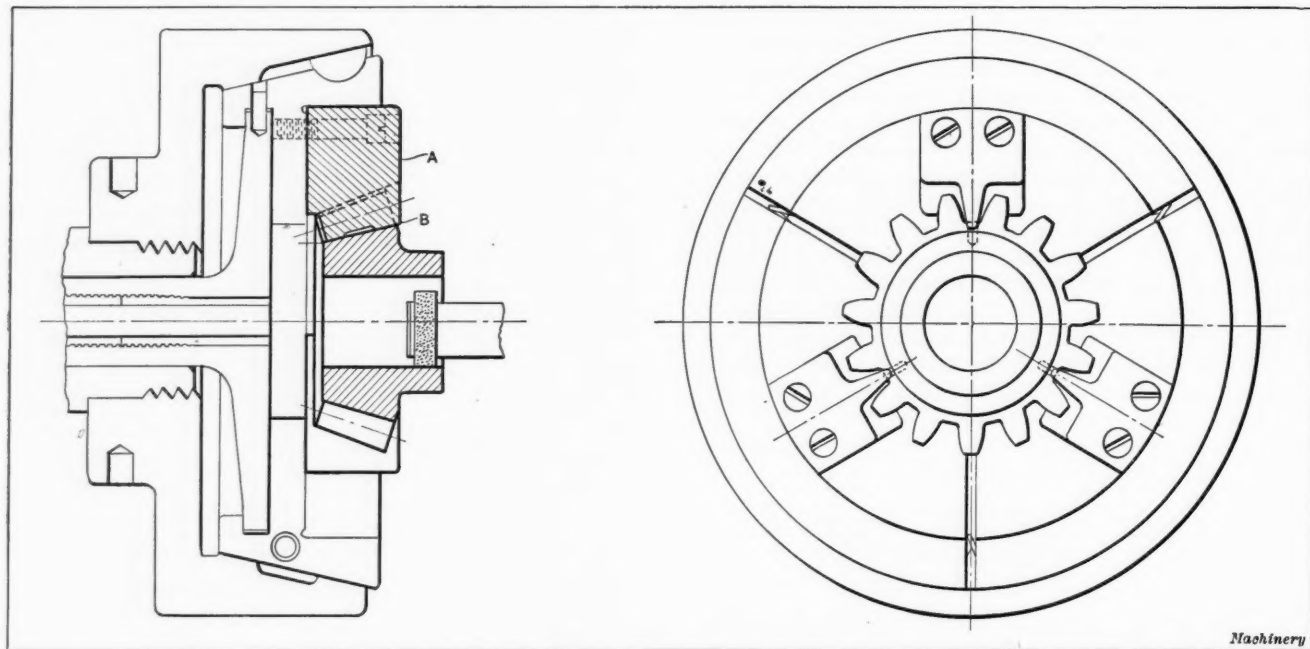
Bevel Gear Chuck with Jaws which engage Bottoms of Tooth Spaces
